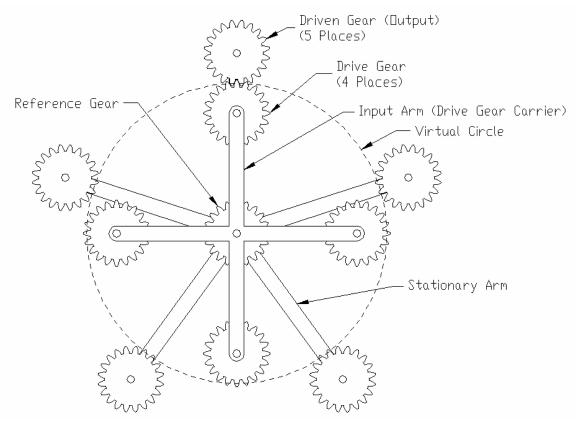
Embodiment 3 with Vernier Relationship between Drive and Driven Gears
